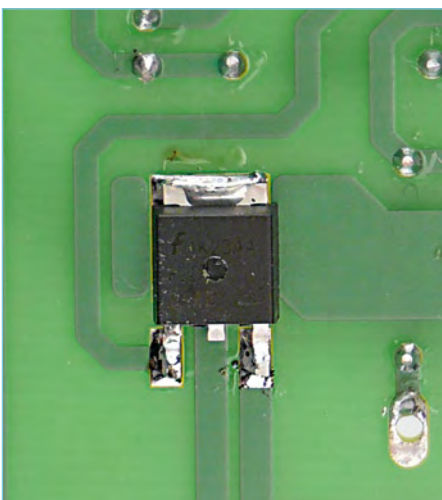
The power MOSFET is soldered to the PCB underside. No connection to the centre pin is necessary.
